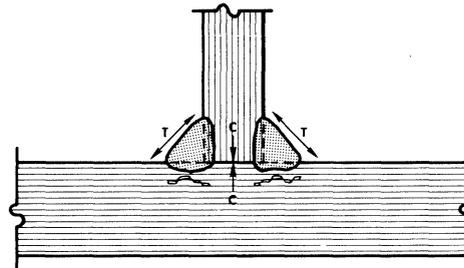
Example of fit-up restraint with large double fillet welds
